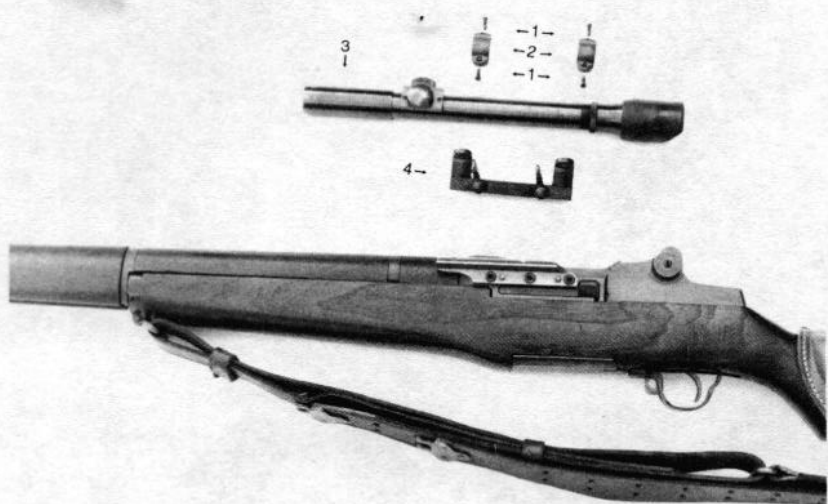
Telescope, M 82 and mount assembly (M 1C, Sniper only).
